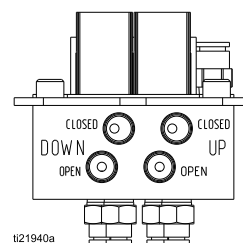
Tubing Connections at Solenoid Manifold, to Pump Outlet Manifold
